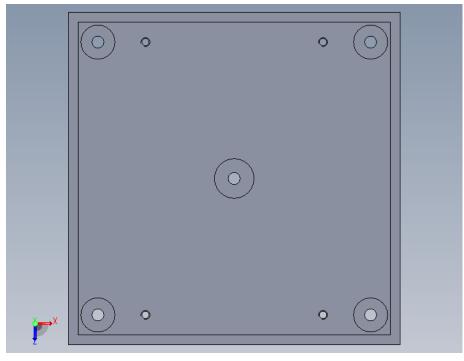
Payload base with 10cm by 10cm square dimensions that will attach to the mounting plate via bolts through the single inner hole and four outer holes.
